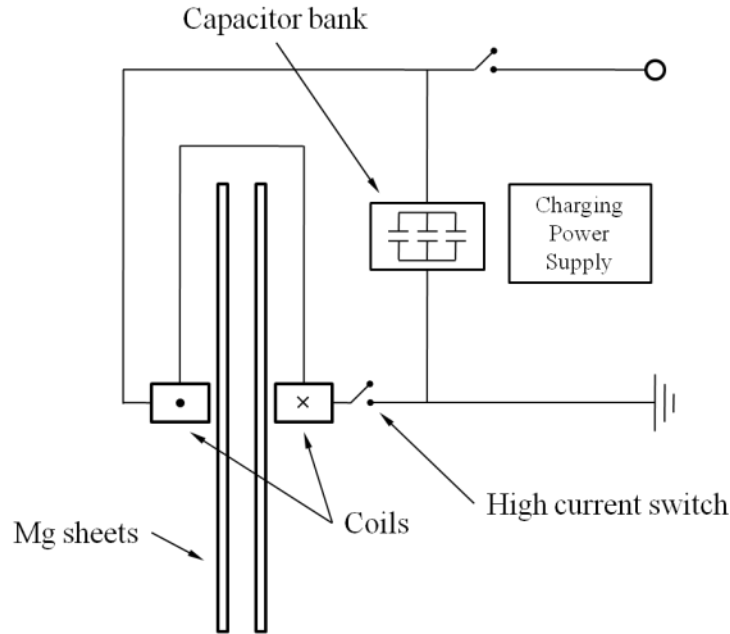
Simplified circuit diagram of MPW machine and welding coils
